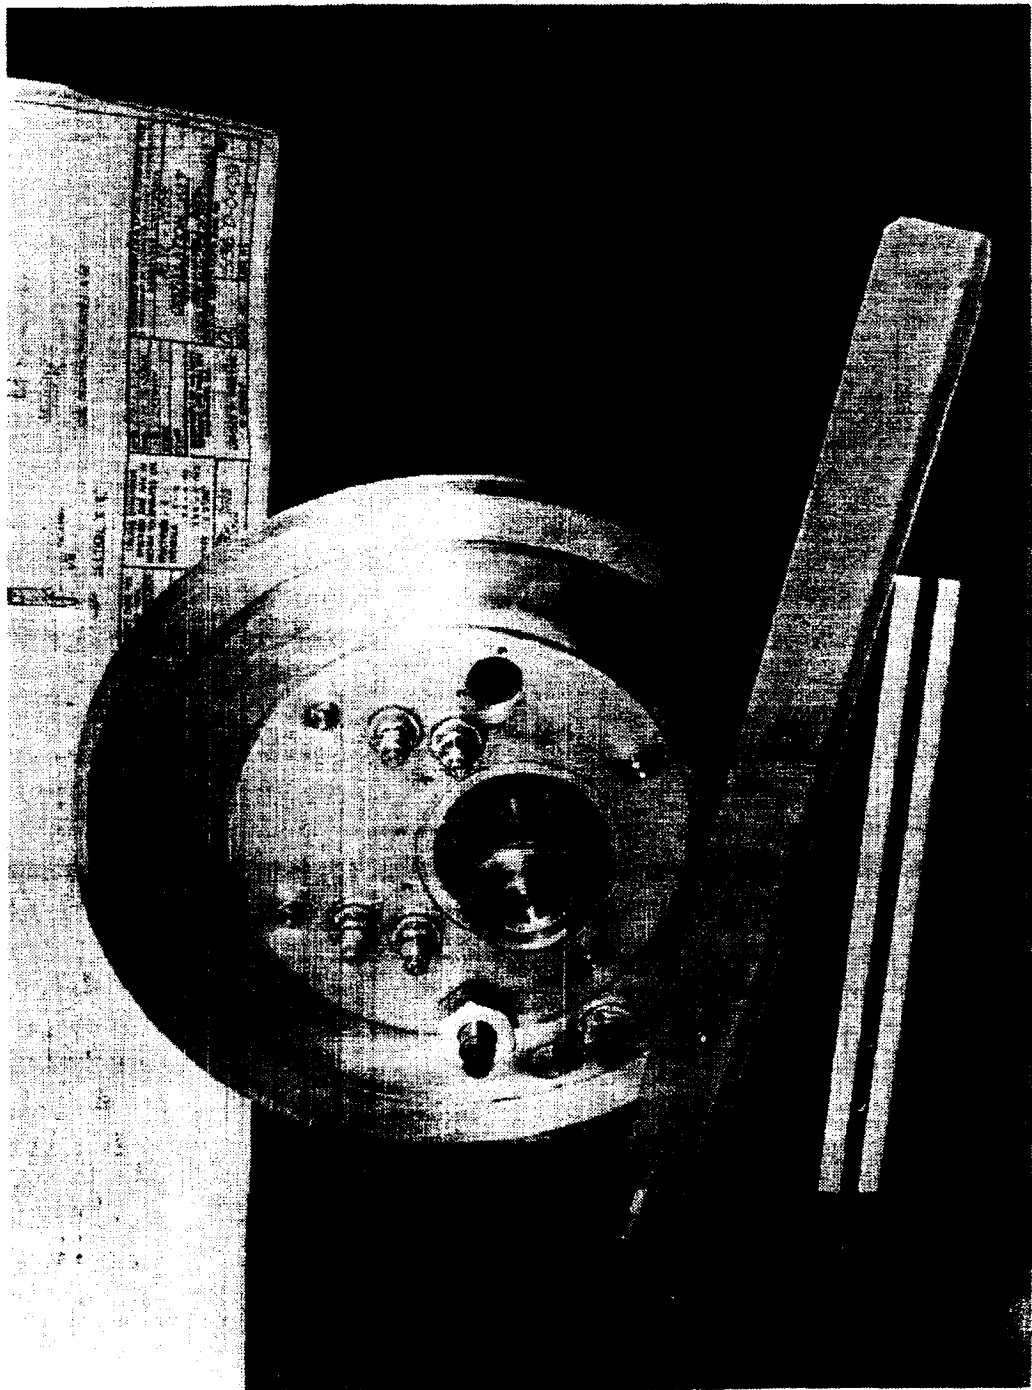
Compressor Drive Motor with Stator and Hermetic Sleeve Removed
